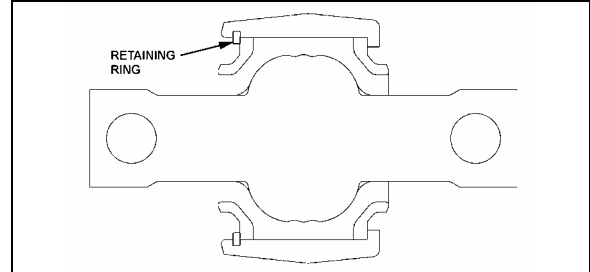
UPPER A-ARM BALL JOINTS 16115
